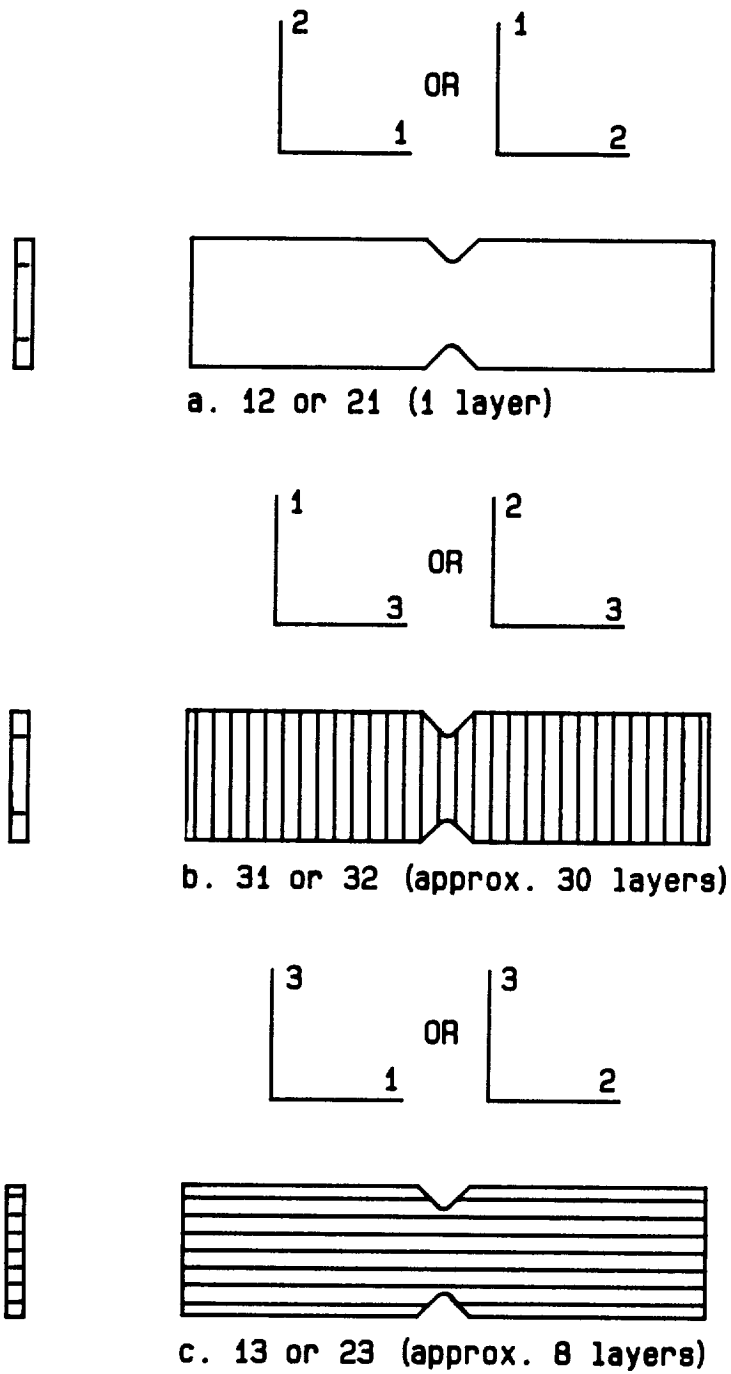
Possible Iosipescu Shear Test Specimen Configurations.
